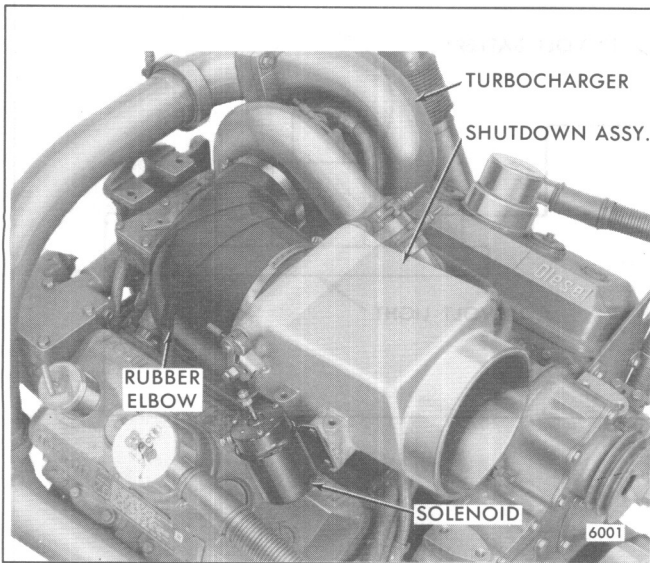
Emergency Shutdown Assembly (Direct Mounted Turbocharger)
